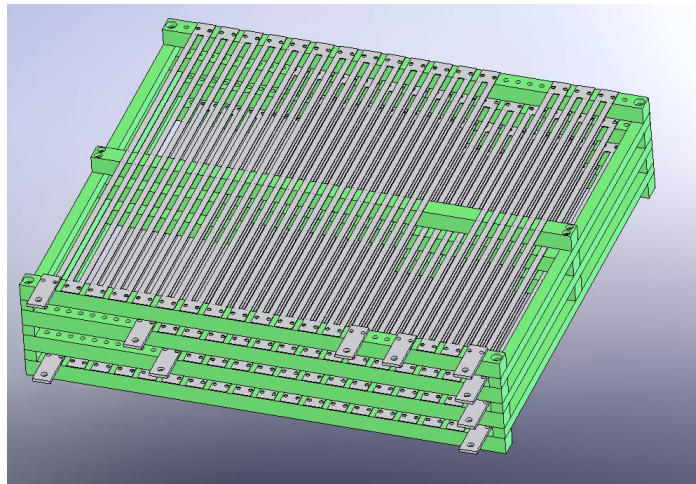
CAD model of a dump resistor, where the assembly shown fits inside a standard 19"-wide rack-mount box.
